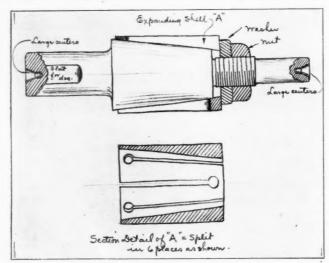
Sketch of Expanding Arbor that gives Good Practice in Free-hand Drawing
